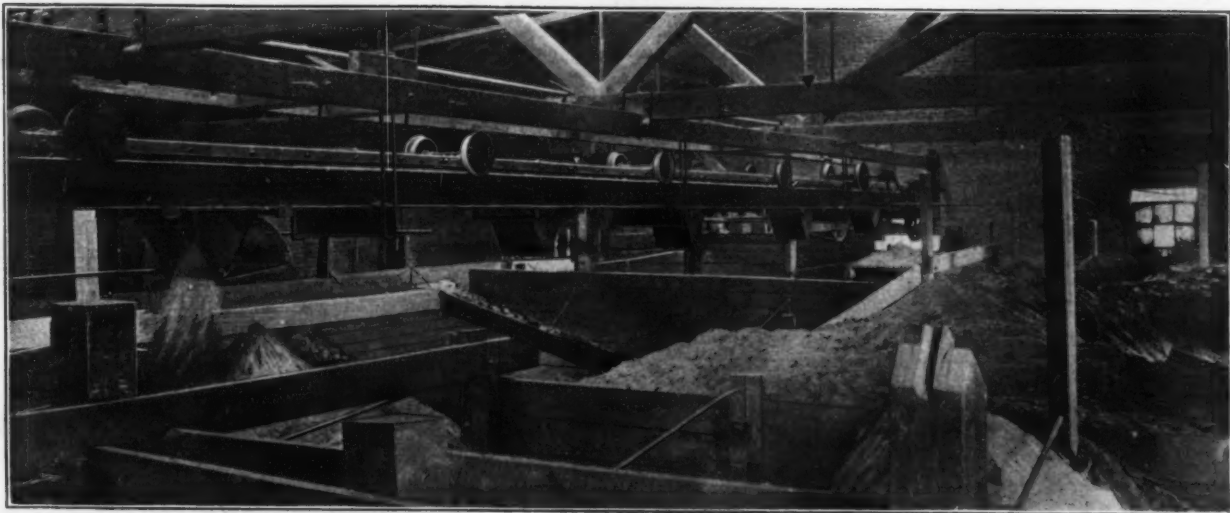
Sand Conveying Equipment Installed in the Atha Steel Casting Company's Foundry by the Link-Belt Company.
